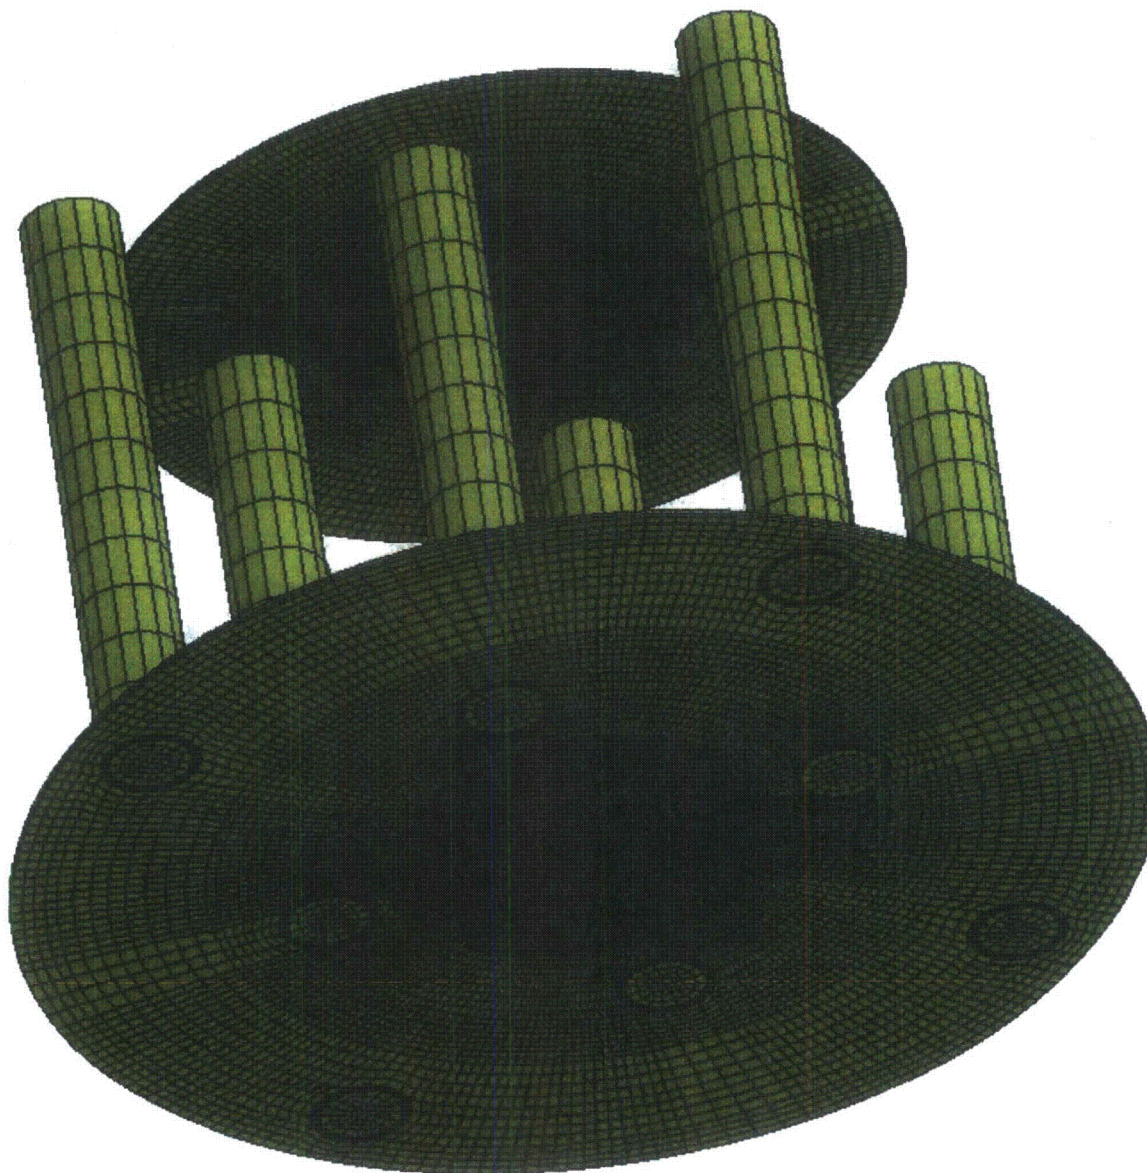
Ring Assembly Shoring Bottom View; Meshed
